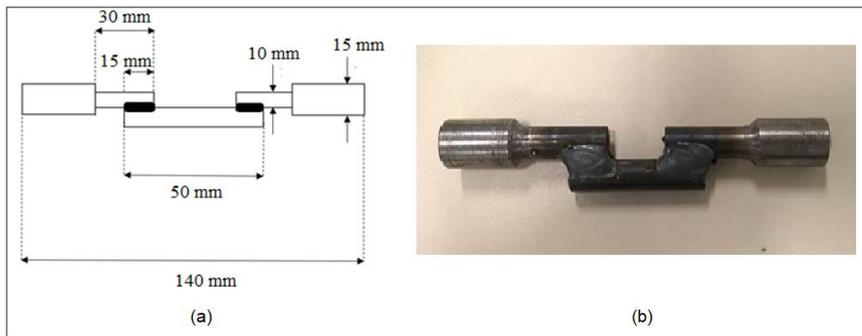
(a) Design of welded specimens, (b) welded specimens.
